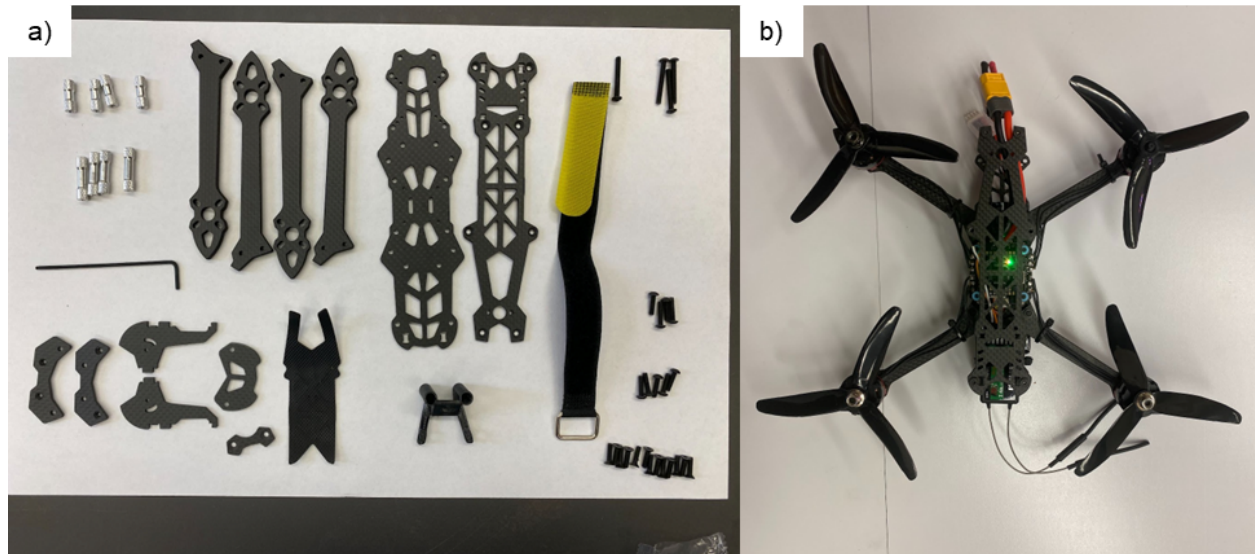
Drone assembly in (a) disassembled form and (b) physically assembled.
